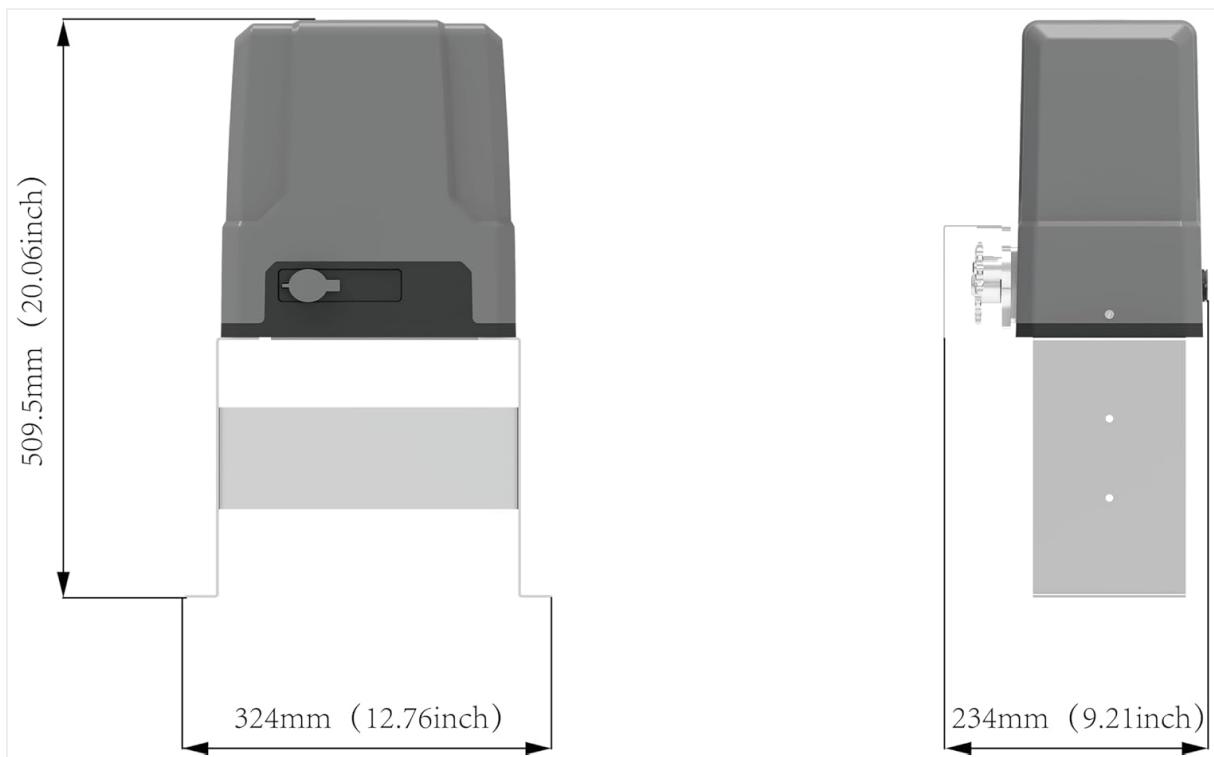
Technical drawing illustrating the dimensions of the GATEXPERT GT1100DC gate opener in millimeters and inches.
